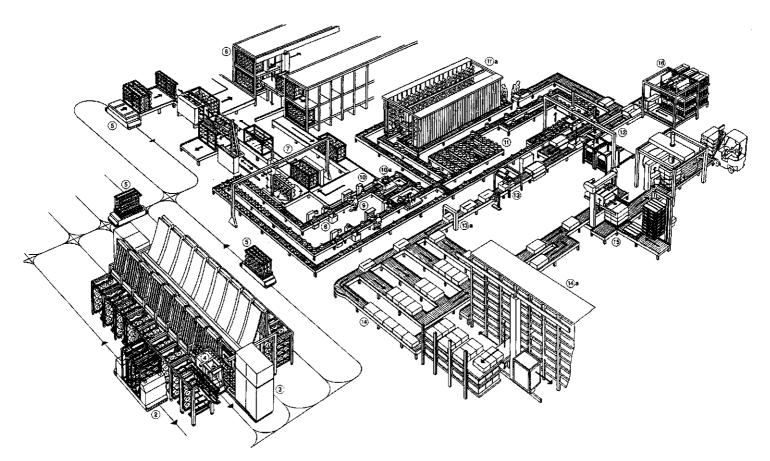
Automatic package handling line for drawtexturizing machines, from POY supply through to despatch [4]: POY packages in creel change wagon (2); drawtexturizing machine Barmag FK6 (3); doffer for texturized packages (4); intermediate storage (6); weighing and inspection (7...10); sorting according to quality standards (11); packing, weighing, identification (12, 13); carton storage (14); cartons stacked onto pallets and prepared for despatch (15)
